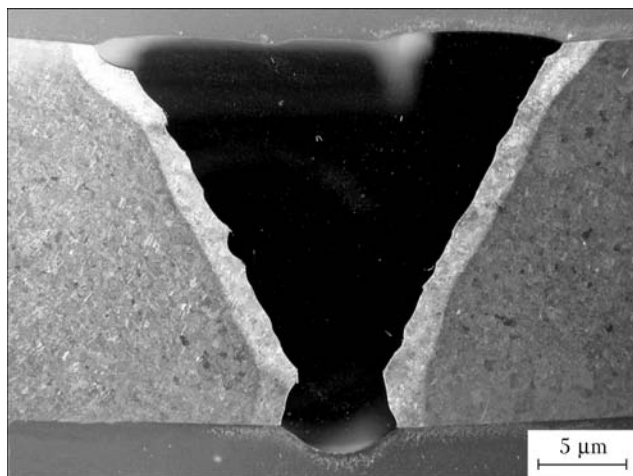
Macrograph of NPM1 test weld fabricated with nickel-base filler metal
